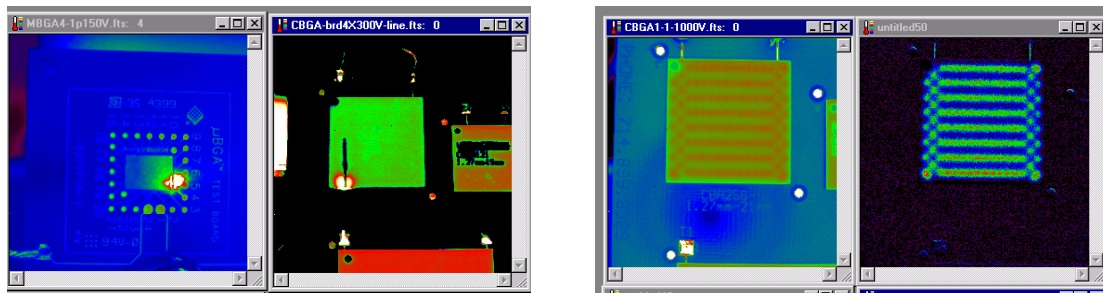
Infrared images of welds produced by a nondestructive pulsed heating technique. *Left:* Bad welds heated up after 200-V pulses. *Right:* The entire BGA heated up after 1-kV pulses.
